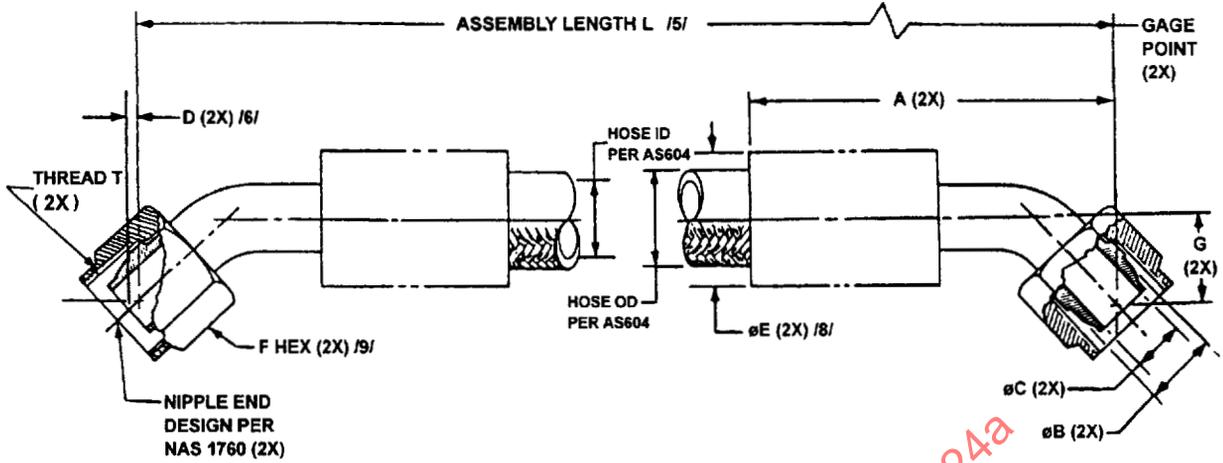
HOSE AND FITTING DIMENSIONS
